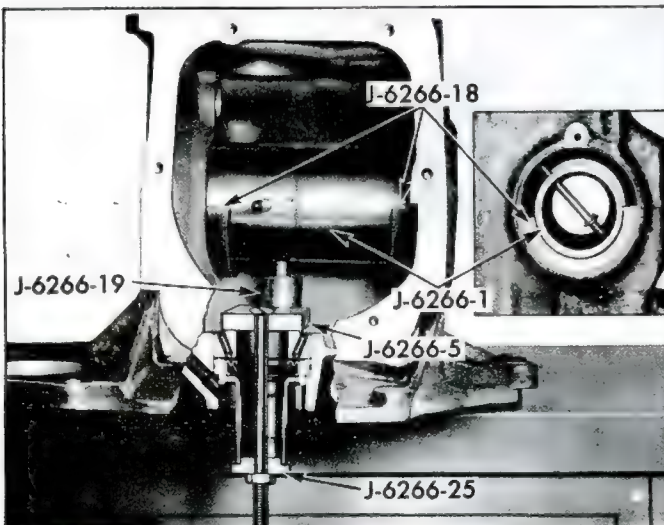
Pinion Depth Shim Selection Gauge—Installed Views
